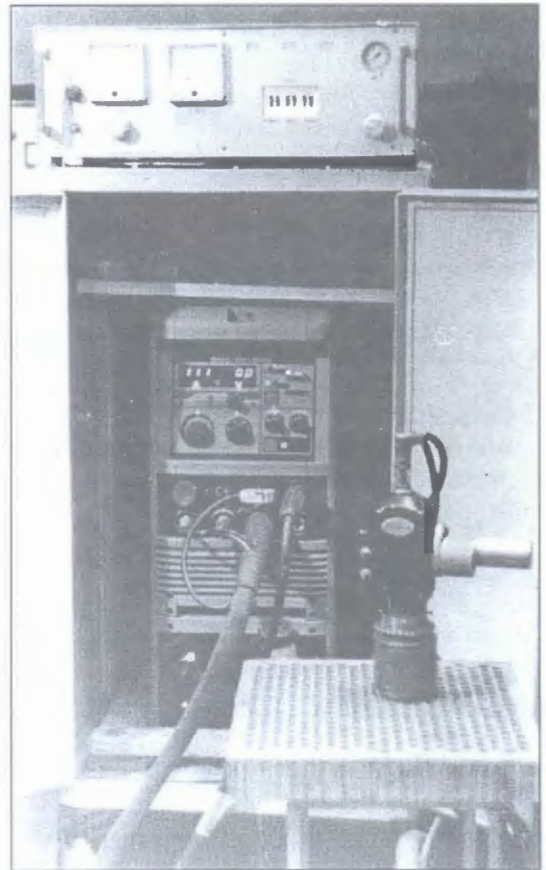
Automatic machine «Agat-1M» for pulsed welding tubes to tube plates with forced formation of weld
